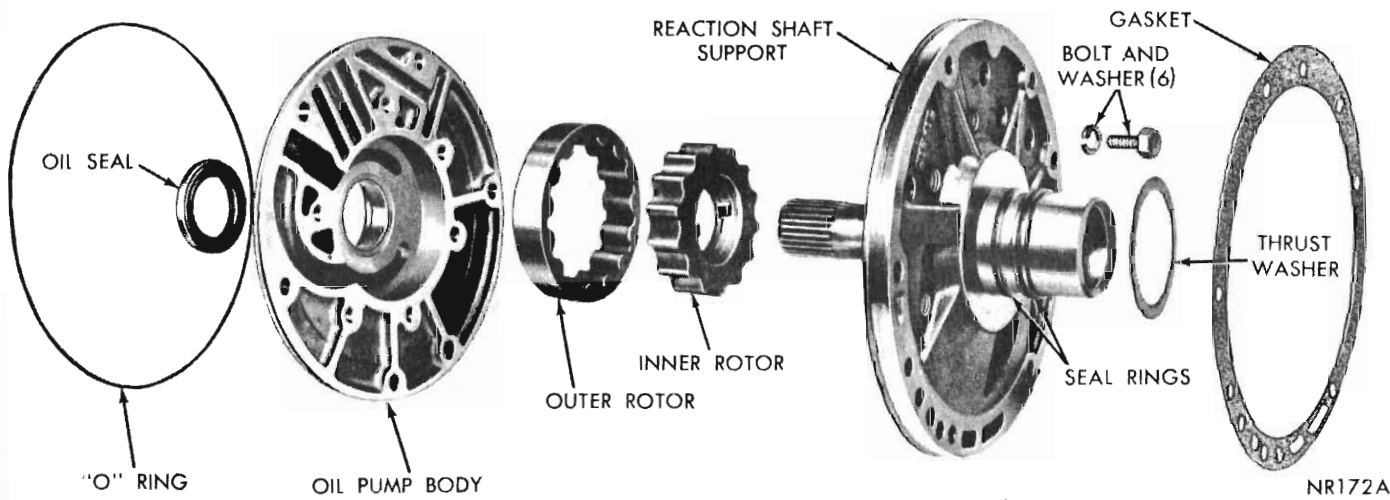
Oil pump and reaction shaft support disassembled (A-904)
